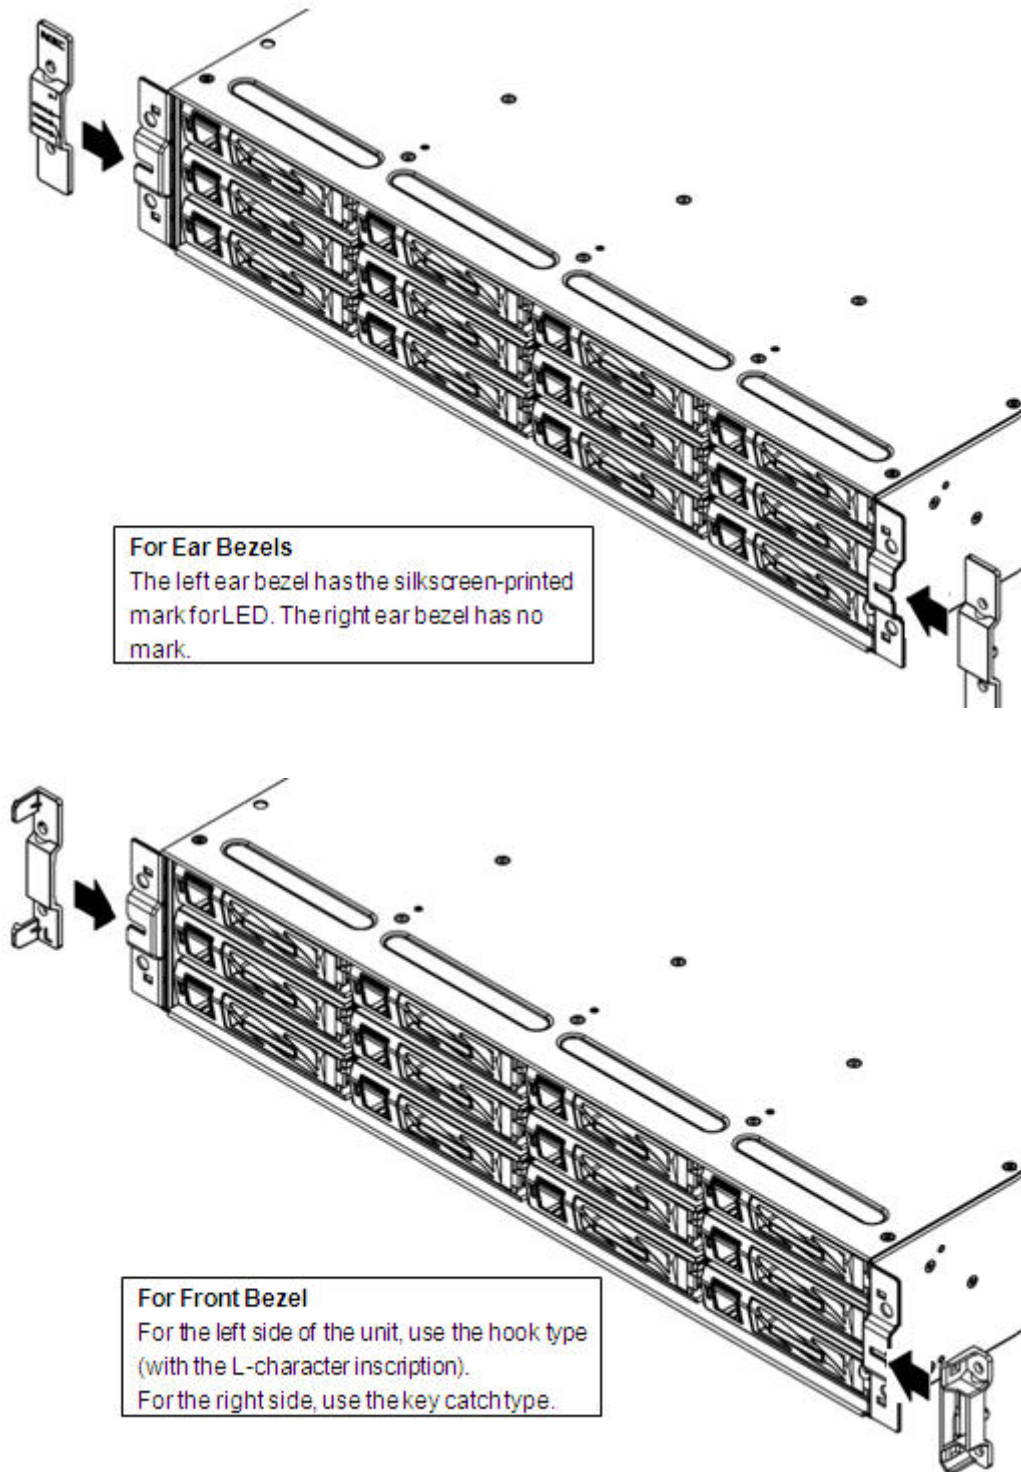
Attaching Ear Bezels or Front Bezel Clips
